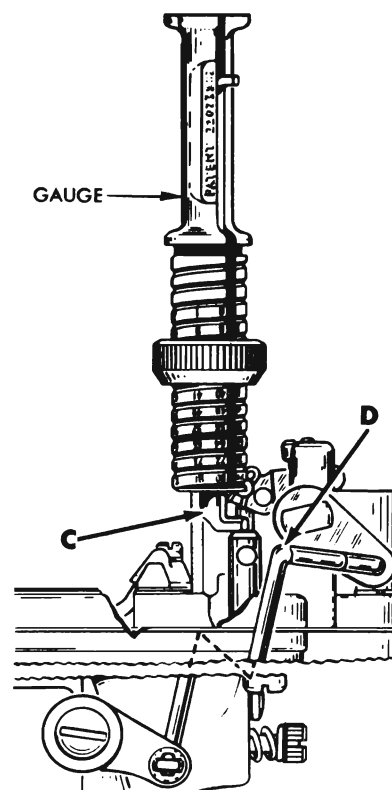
Use of Pump Stroke Gauge T109-117S
